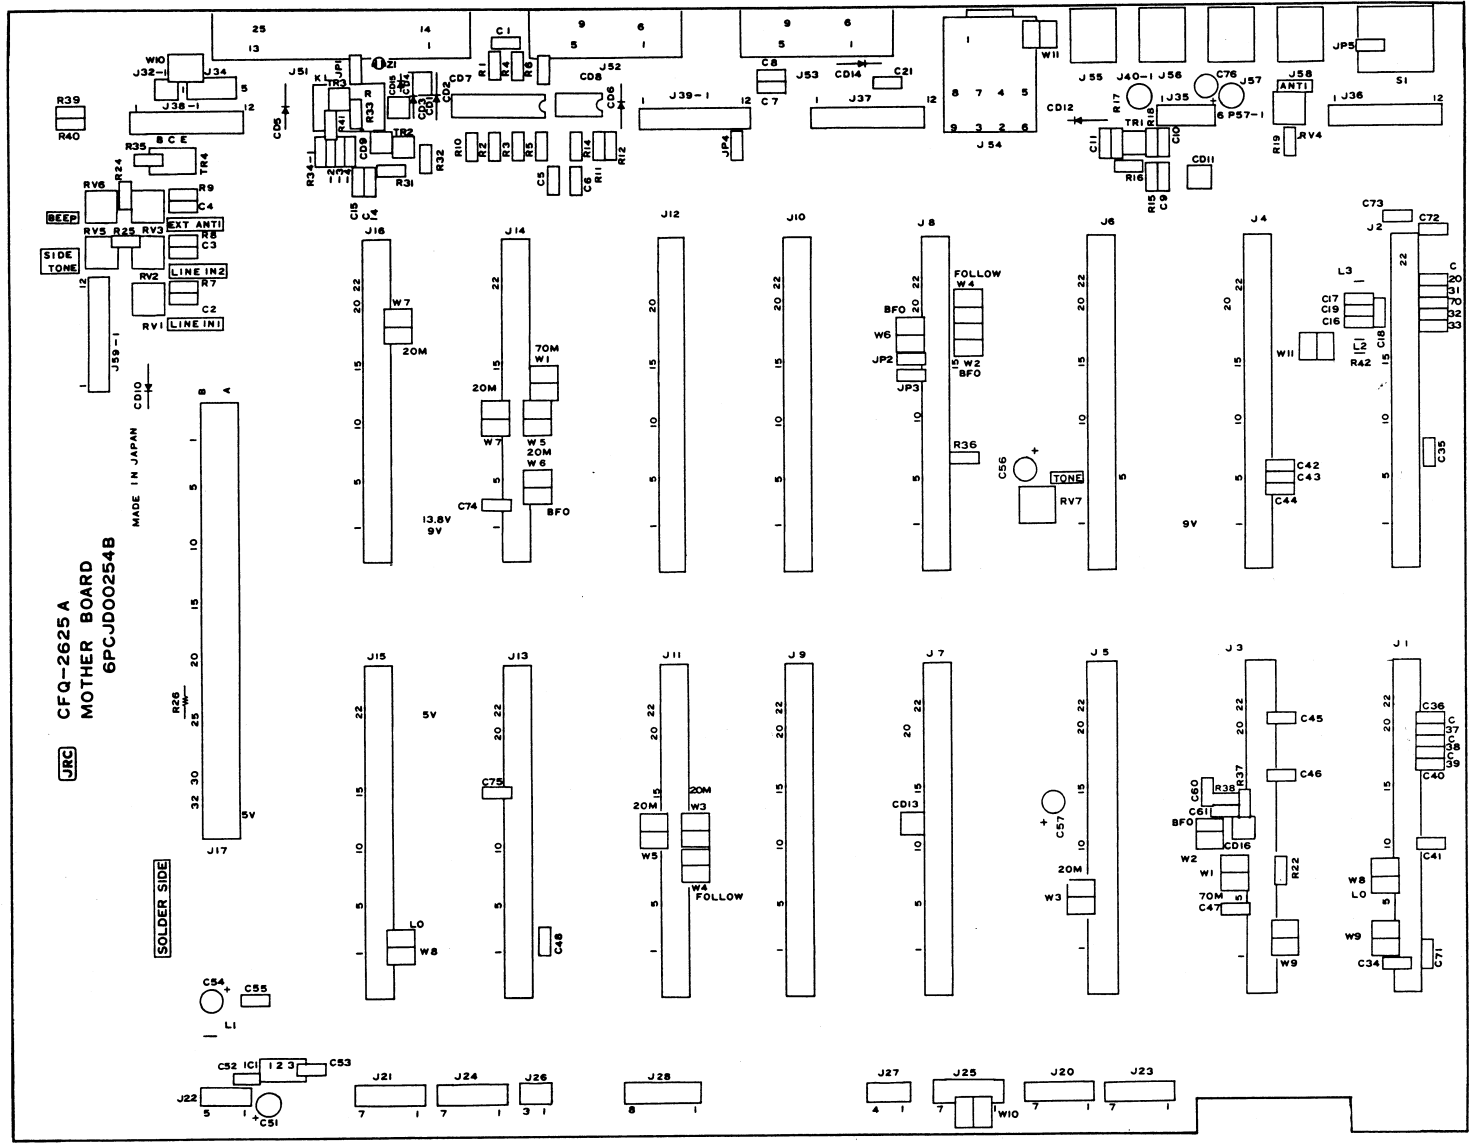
MOTHER BOARD CFQ-2625A Component Layout
